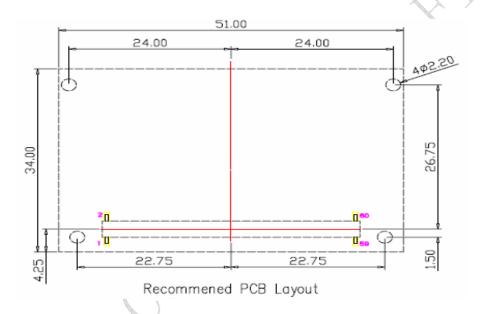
Mechanical dimensions of module PCB decal (Unit: mm)
